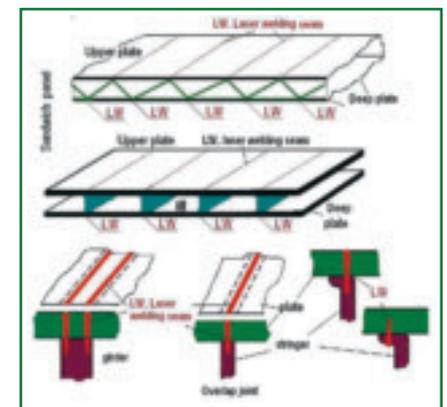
Laser beam welded sandwich panels featuring overlap joints.
